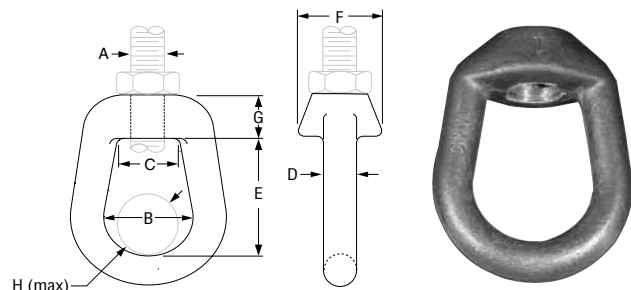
, 290L: LOADS (LBS) • WEIGHTS (LBS) • DIMENSIONS (IN)
